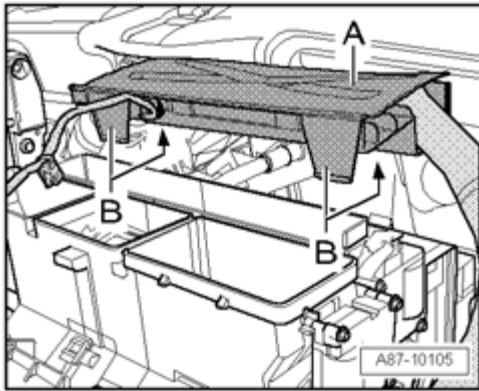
Removing Cable Duct From Heating And A/C Unit
